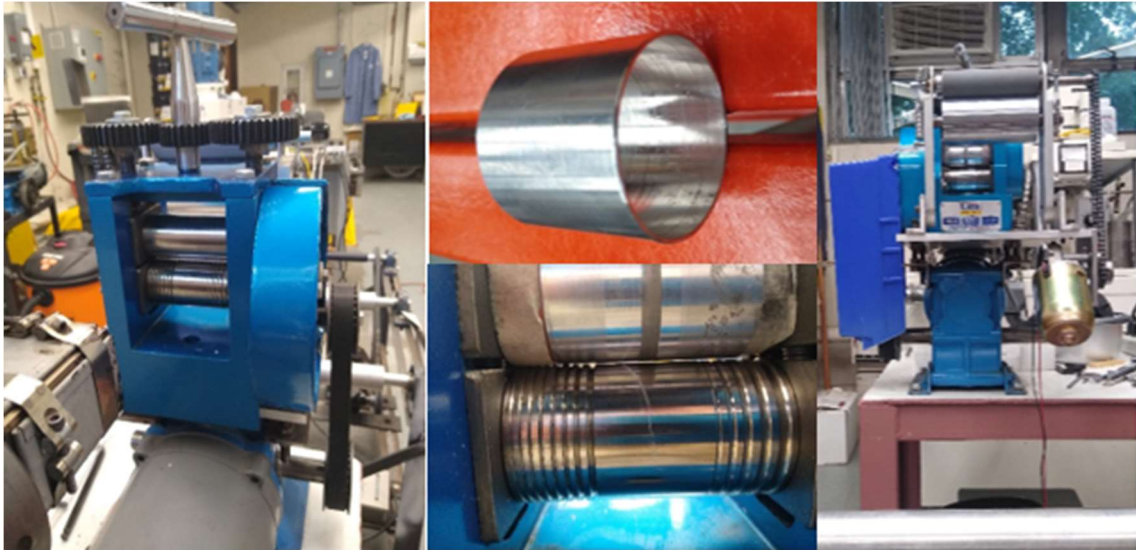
Rolling mill with 40 mm diameter rollers adapter to serve as a calender.
